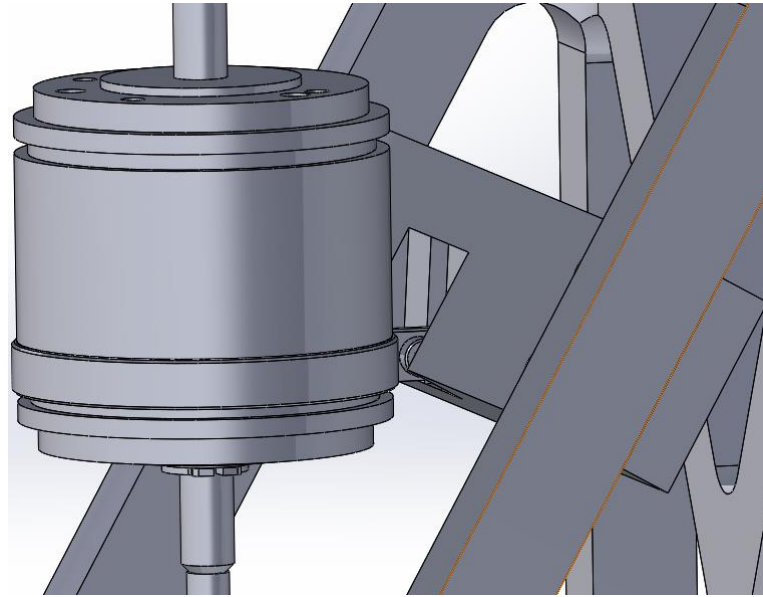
SolidWorks Model of Brace Used to Prevent Gearbox Rotation
